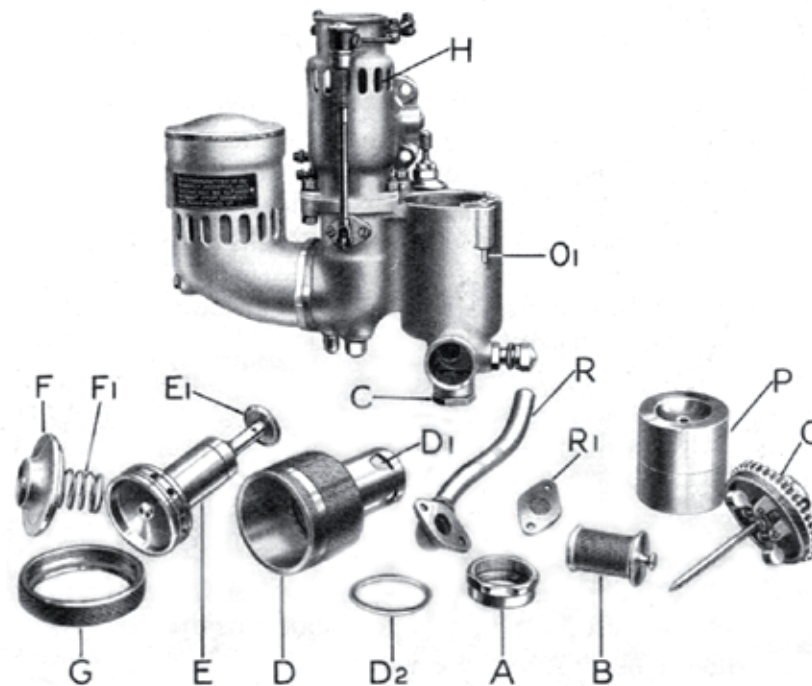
CARBURETTER WITH CERTAIN PARTS DISMANTLED.
